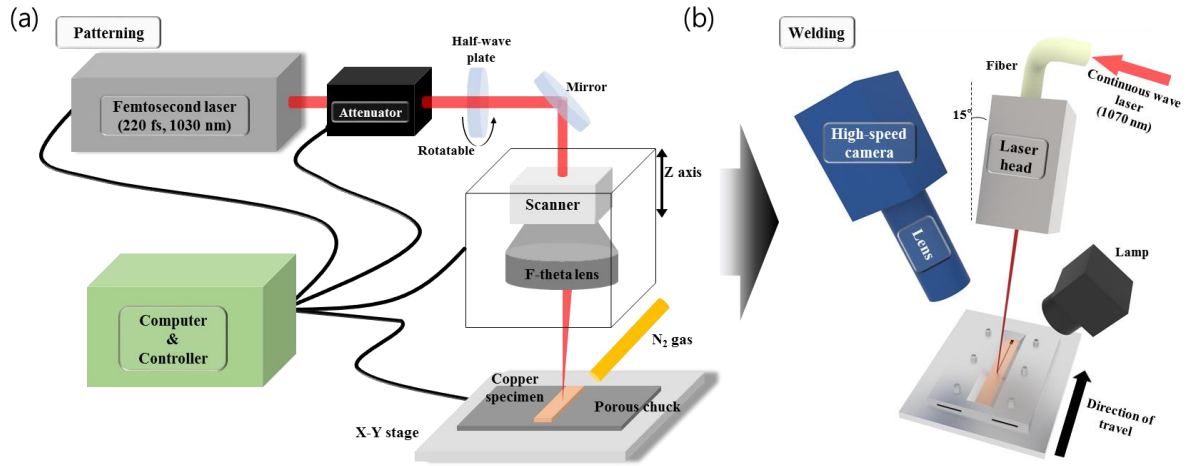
Schematic view of experimental setup. (a) femtosecond laser patterning process for the fabrication of the copper surface with the low reflectance. (b) observation of the surface during the welding process using a high speed camera and the welding process starting from the surface obtained in (a).
